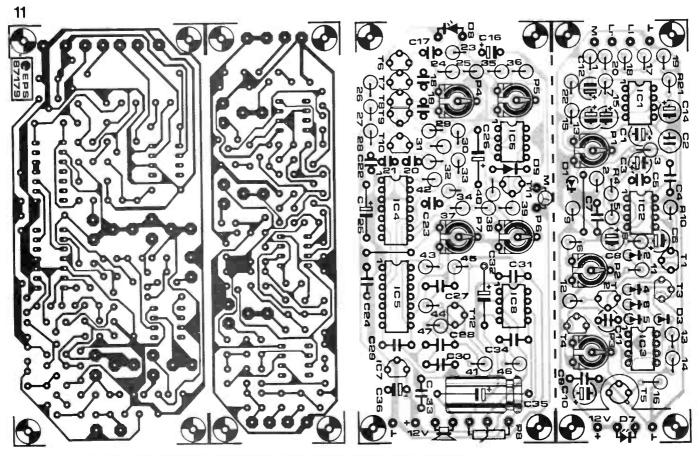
Track layout and component mounting plan of the PCB for building the IR transceiver.
